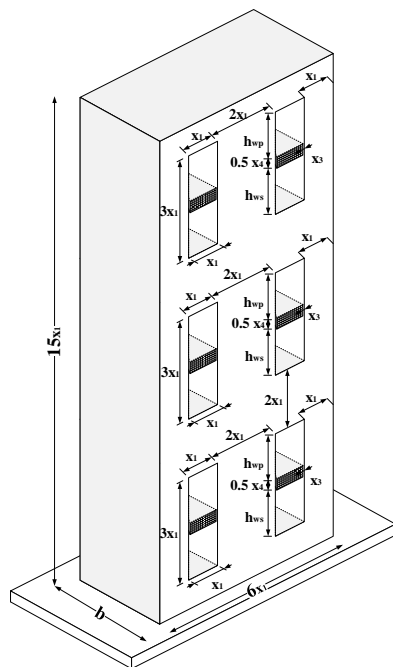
Investigated shapes of three-phase magnetic flux leakage transformer (Geometry and dimensions)
